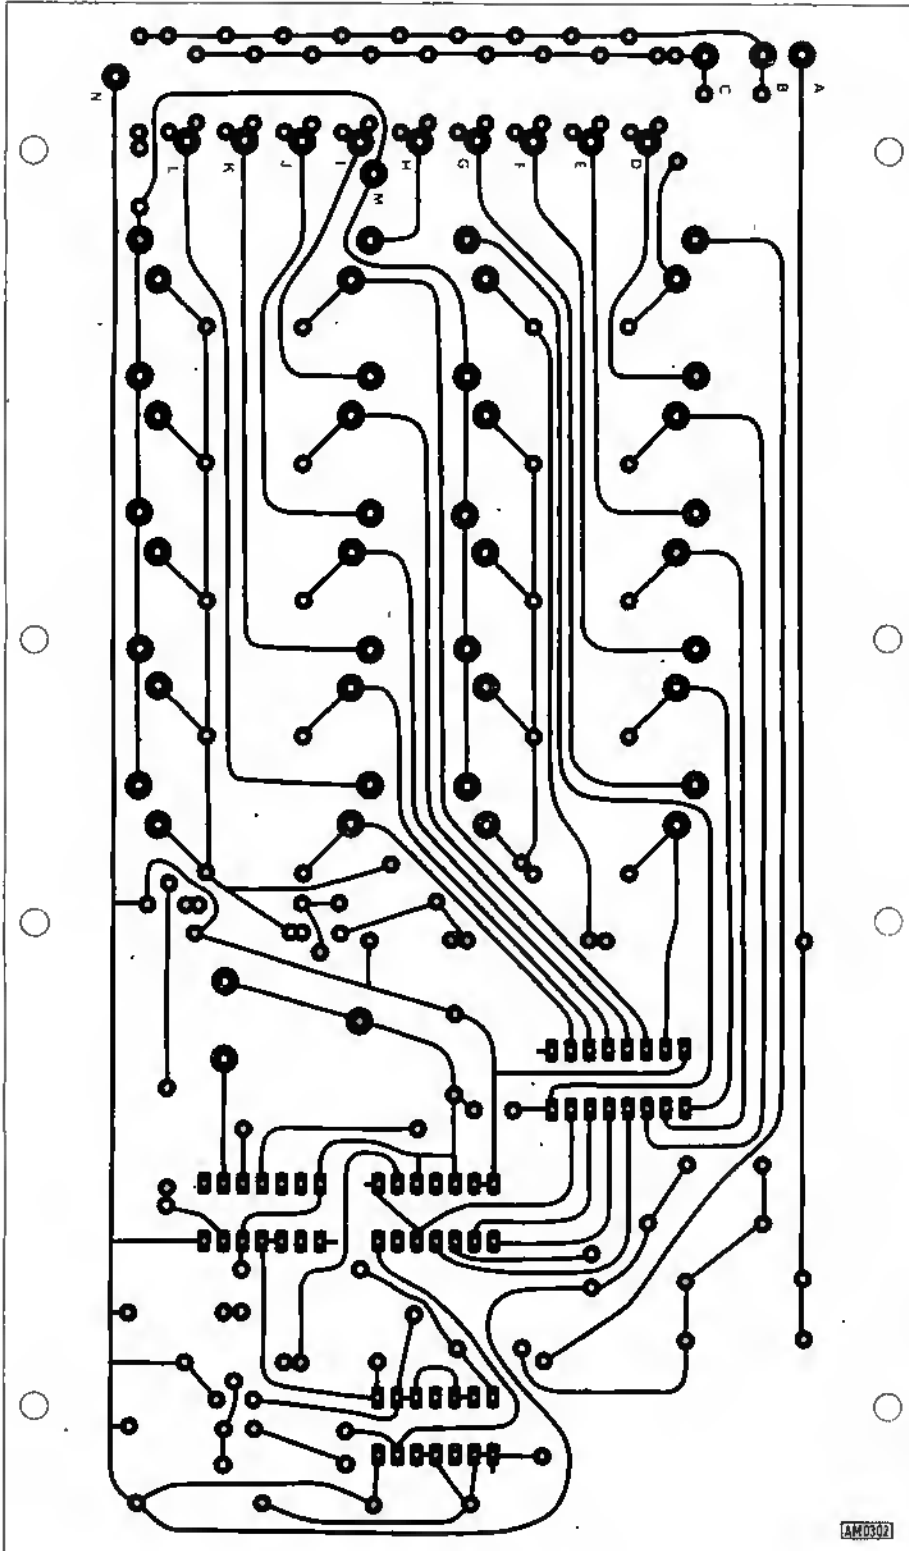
The PCB layout is given here actual size so that it may be copied.
